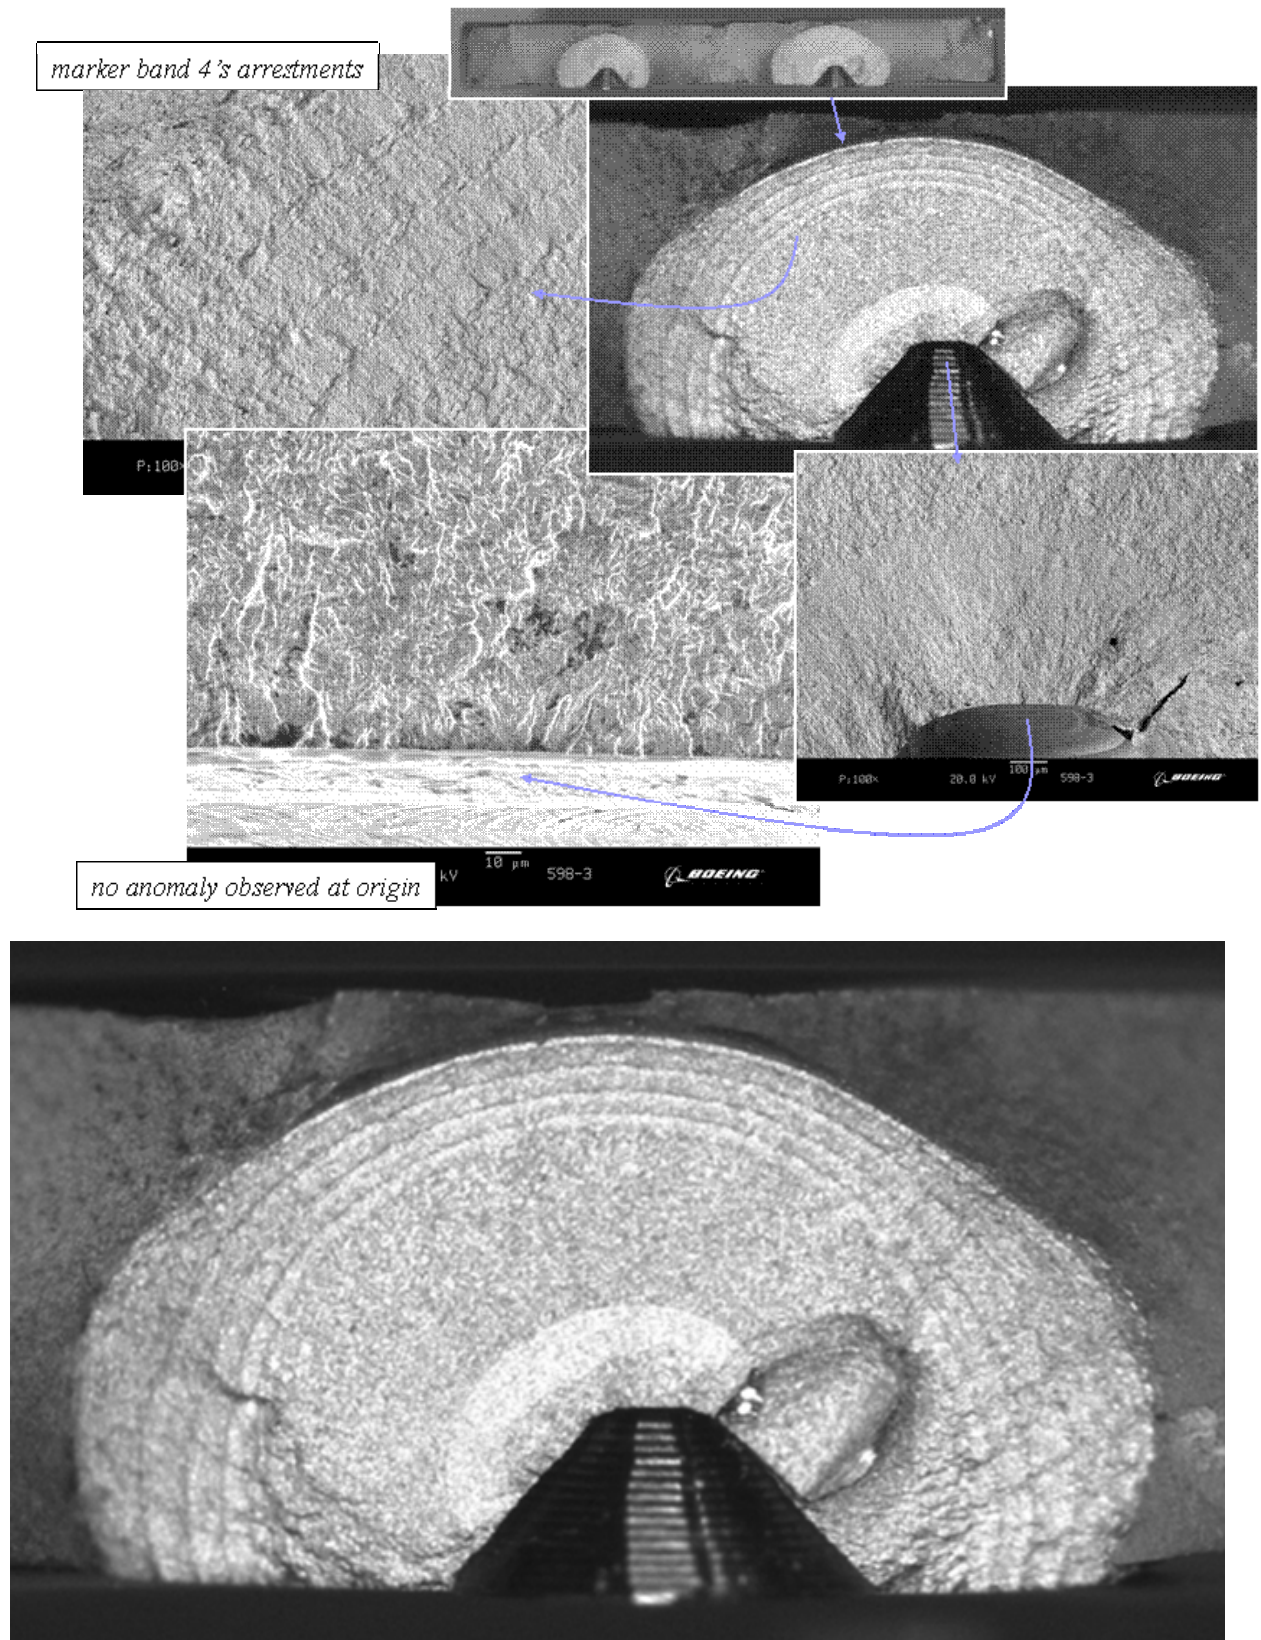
Fracture Surface of Specimen 598-3
